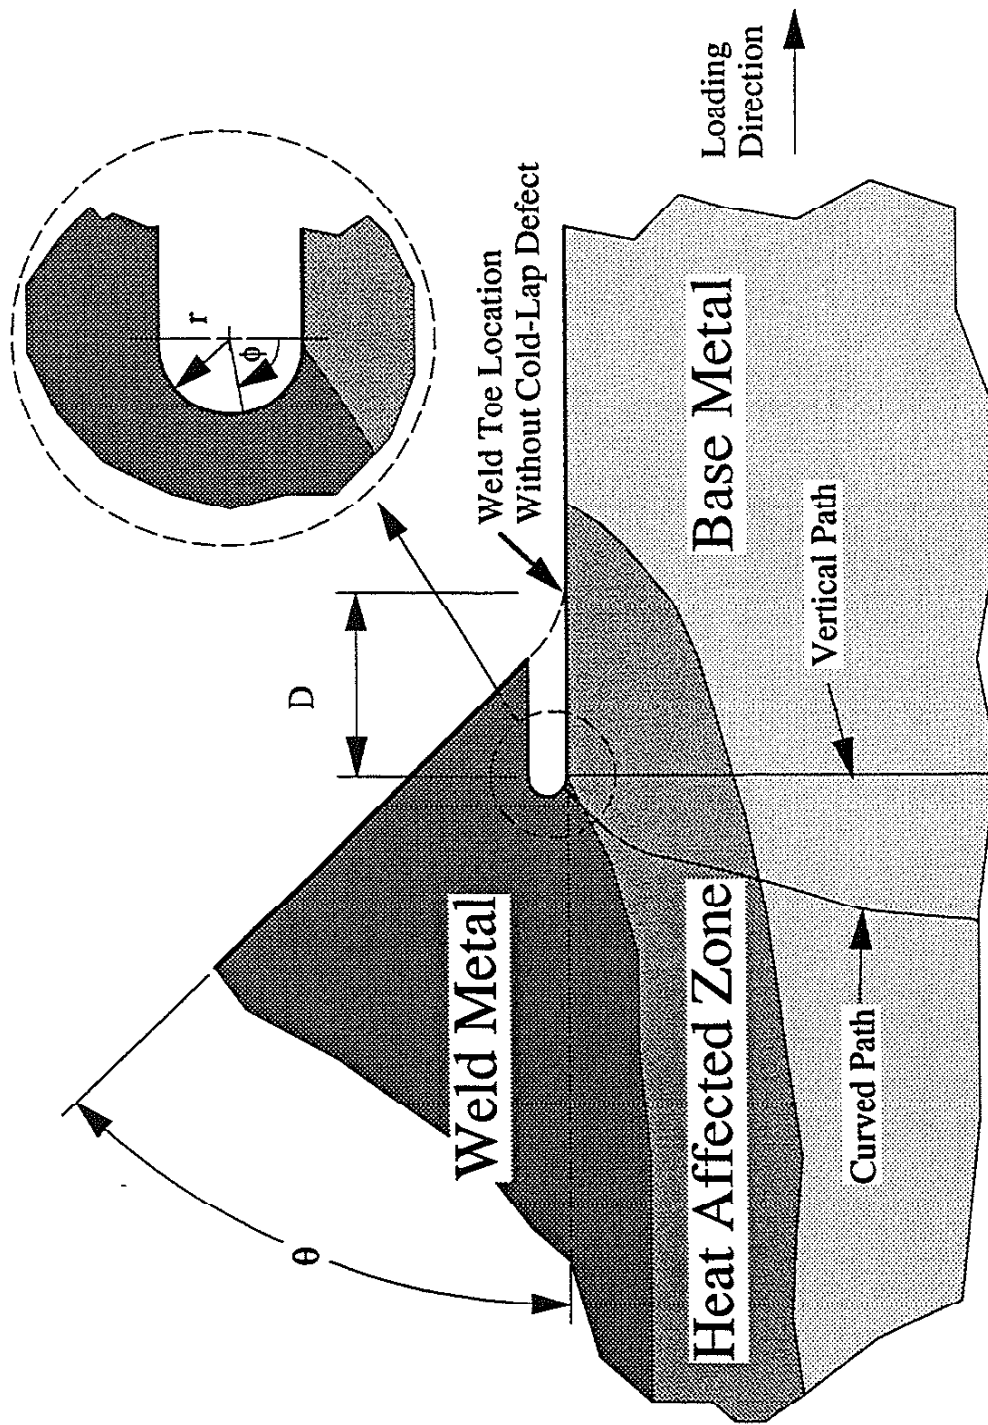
A 2-D section of the weld toe area showing a cold-lap defect.
